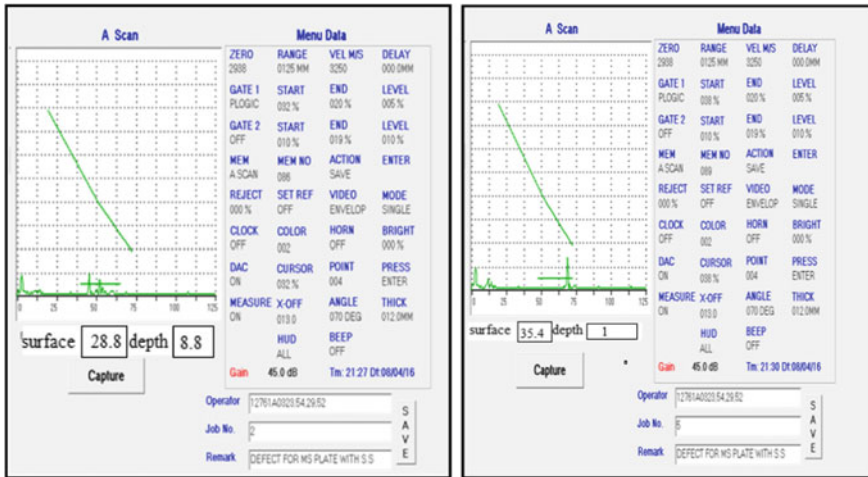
Defects in mild steel plate clad with stainless steel electrode
